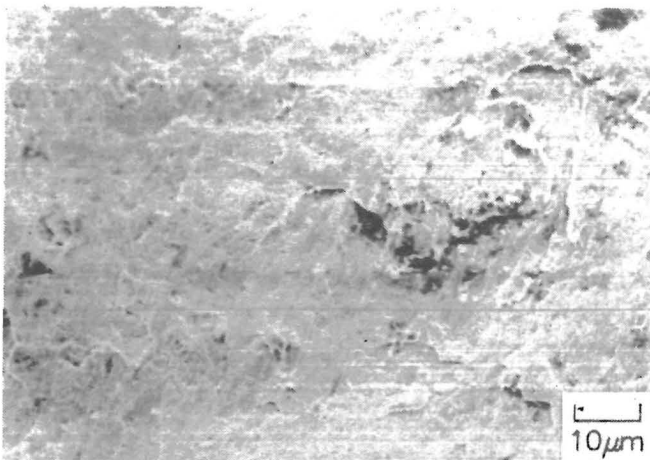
Ductile smearing on machined face of specimen, dry cut, 13.6 scmps.
